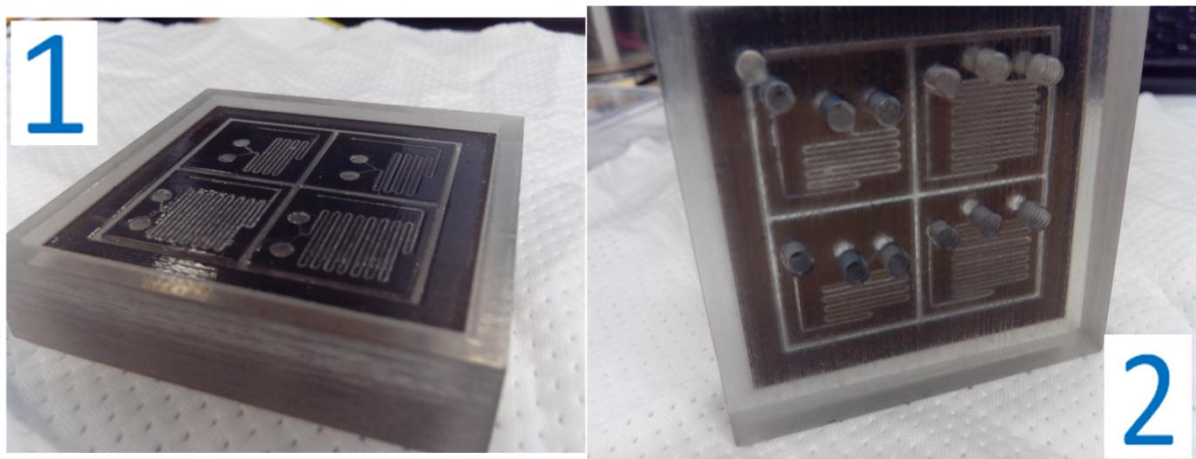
The complete printed channels using 3D printer, 1) top view, 2) bottom view
